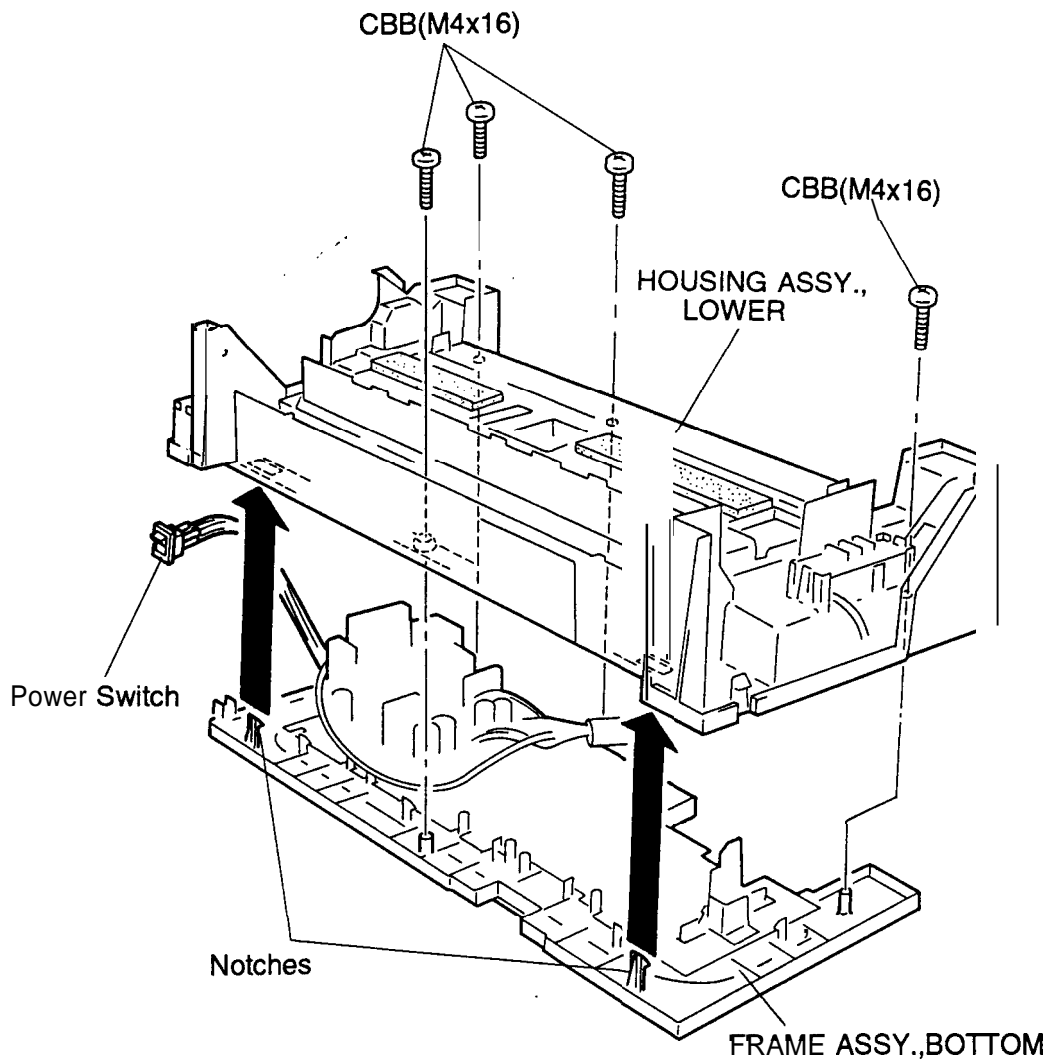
Removing the HOUSING ASSY.,LOWER
